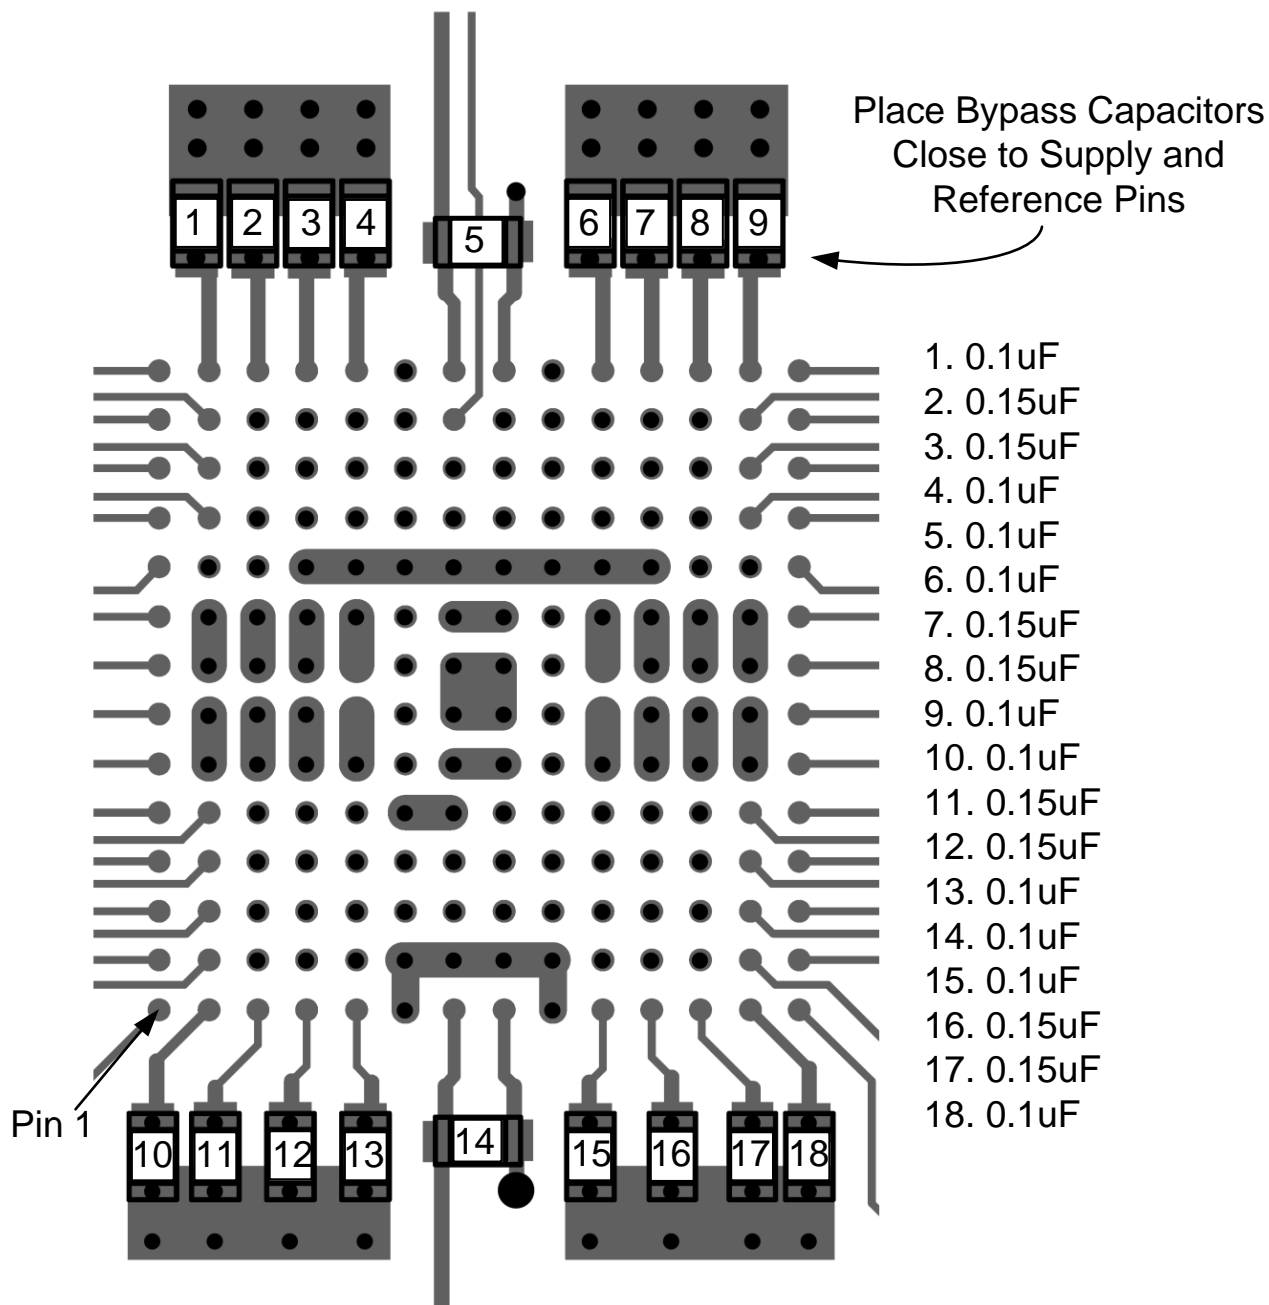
DAC60096 Example Board Layout – Top Layer PCB
